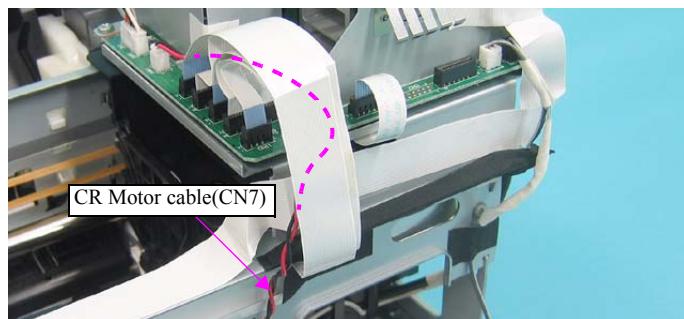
Routing Cables around the Main Board. Unit (5)
